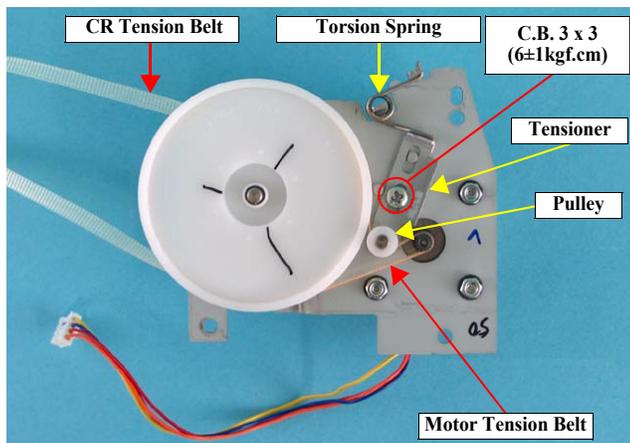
Removing the Motor Tension Belt and the CR Tension Belt
